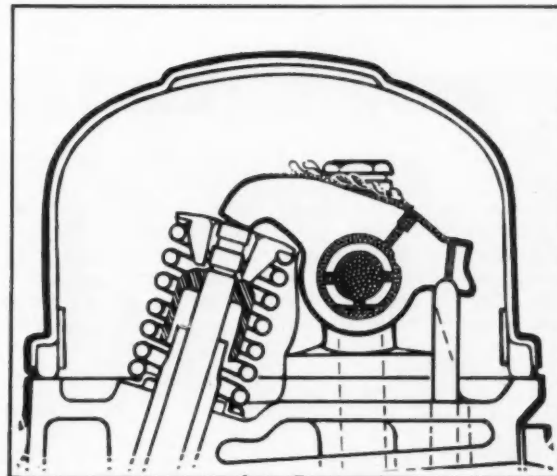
Valve stem and rocker arm lubrication is aided during cold starts by a flat surface on the rocker arm.
